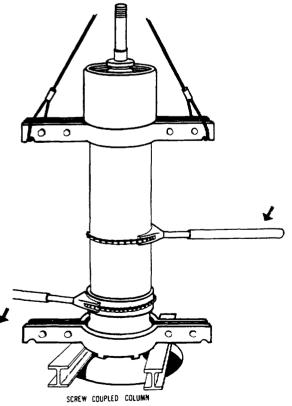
INSTALLATION OF COLUMN PIPE ON BOWL ASSEMBLY
